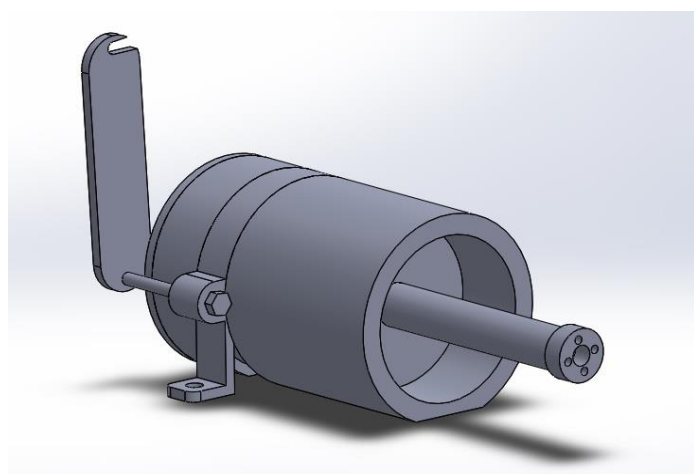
Solid work 3D model of Cylinder, Piston, Connecting Rod and Bracket assembly
